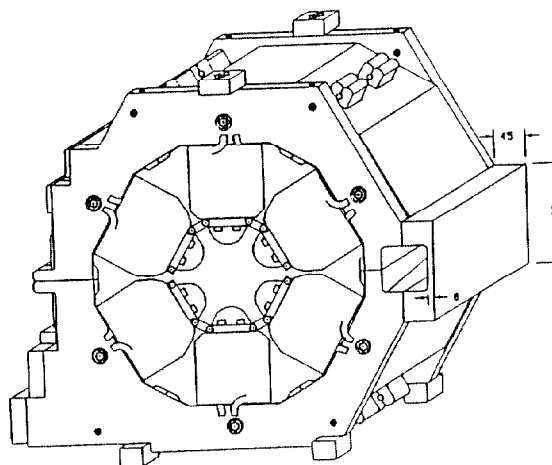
Magnet structure with and without cutting of the one-side sextants.
